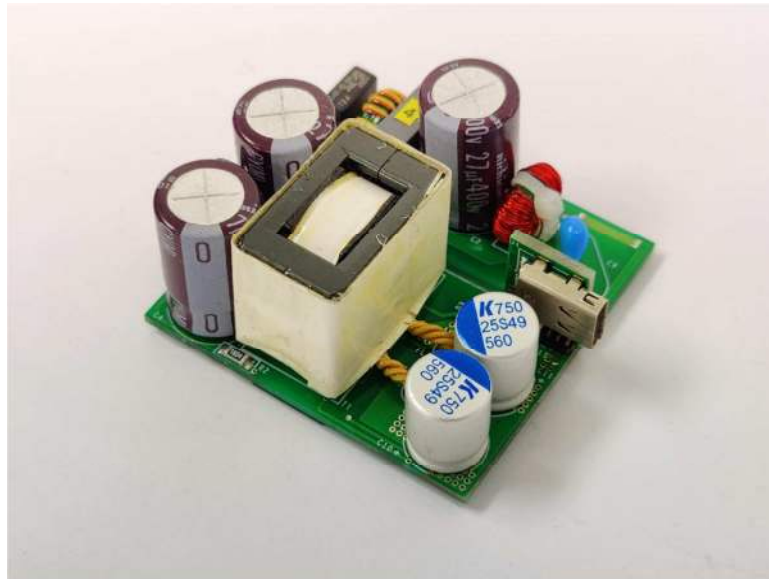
Populated Circuit Board Photograph, Entire Assembly.
